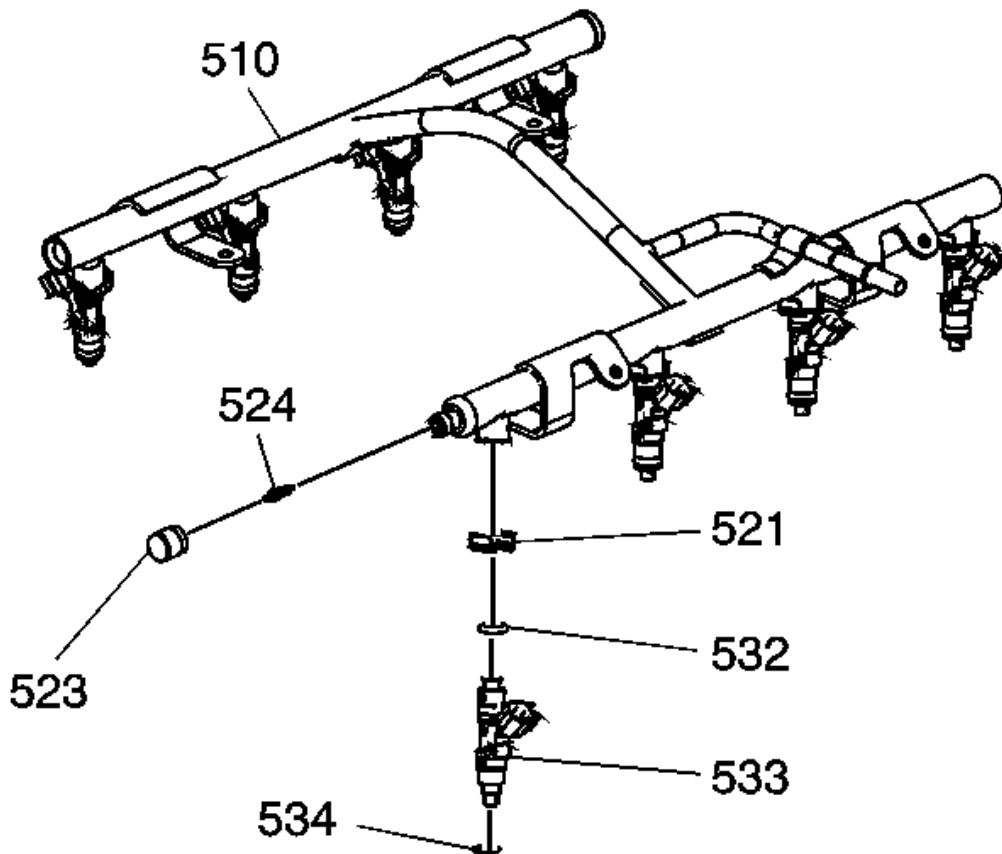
Fuel Injectors, Retainers, O-Rings, Cap & Service Valve
